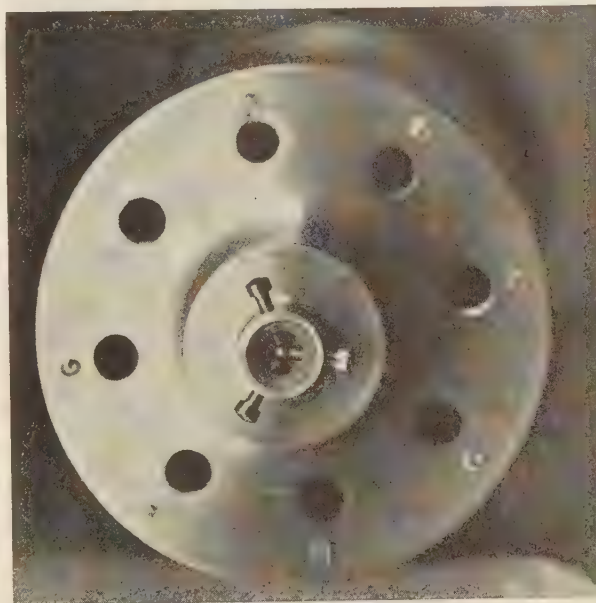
SHAFT FOR HIGH-SPEED BEARING TESTS
